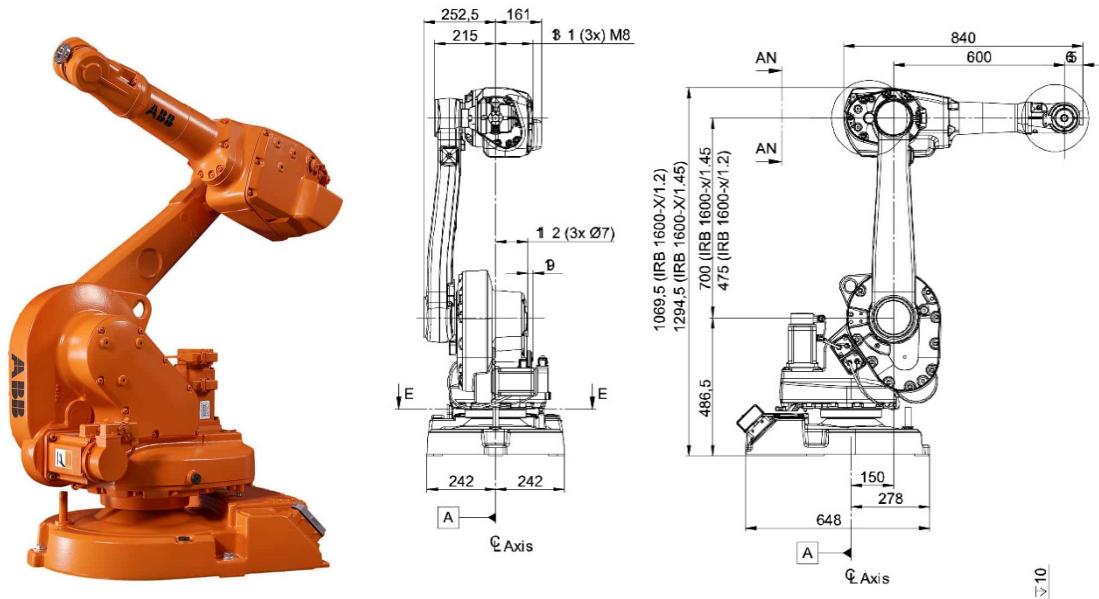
Robot arm IRB-1600-6/1.45 dimensions
